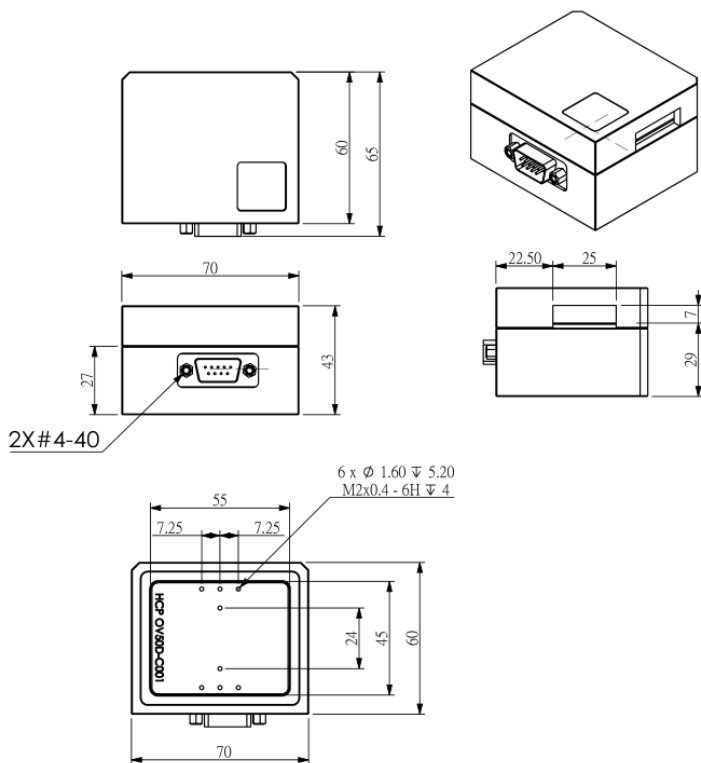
Mechanical drawing of OV-50D (Unit : mm)
